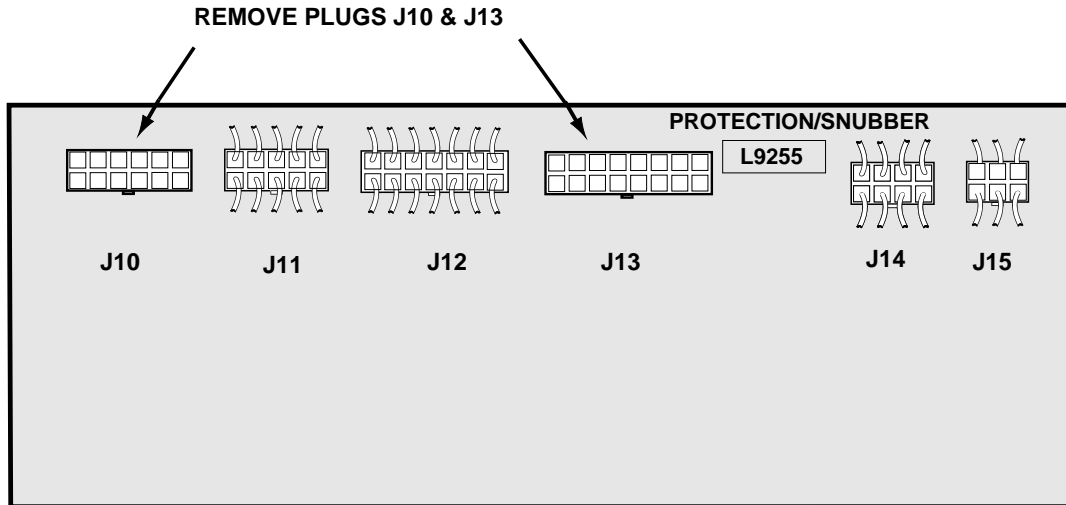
PROTECTION BOARD PLUG LOCATIONS
